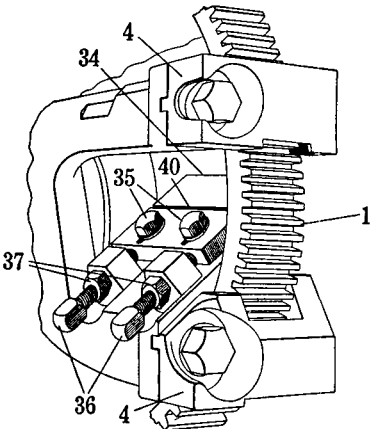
View of the back trimming knife and the adjusting and clamping screws for bringing the edge of the knife in the correct position against the mold, so that it will trim the bottom of the slug and at the same time will not score the mold.
